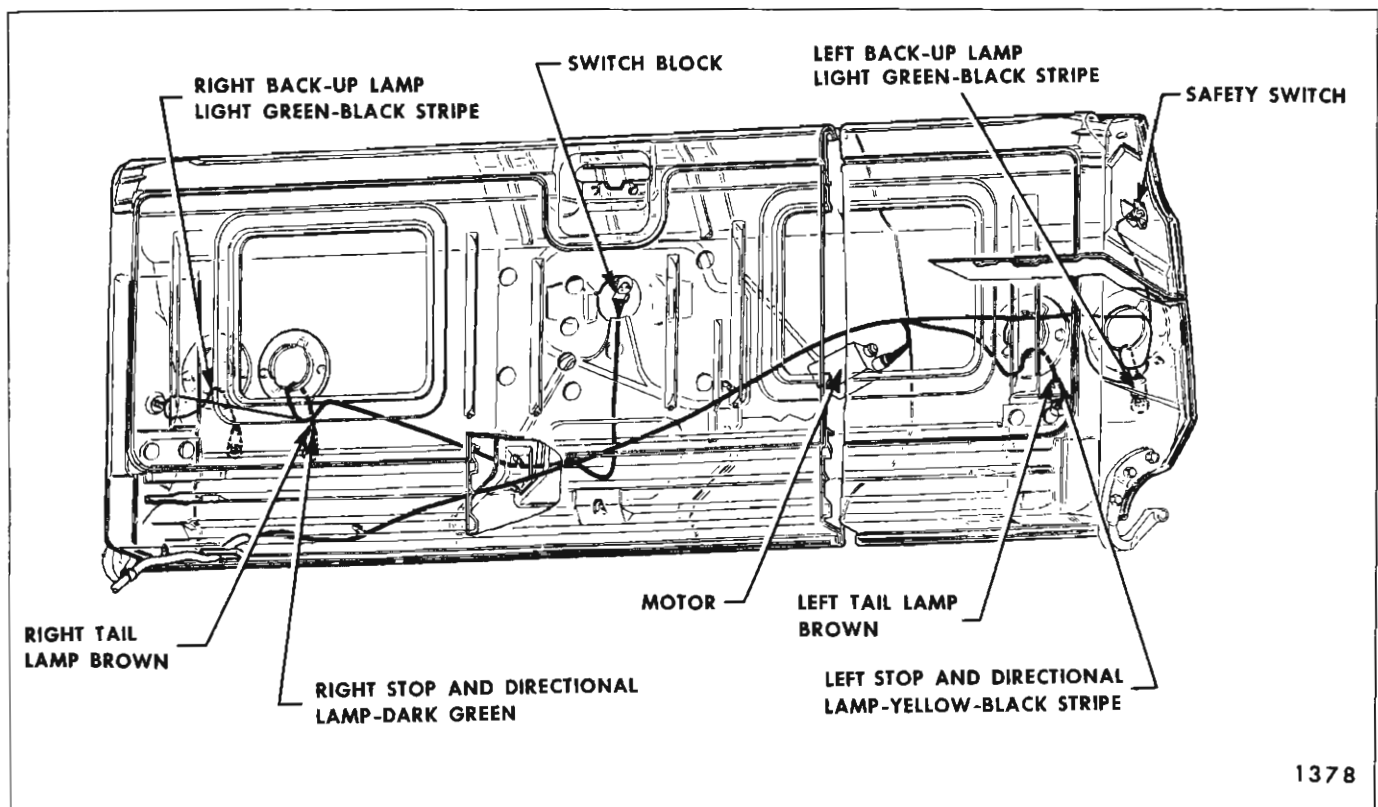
L27—Tail Gate Wiring - 15-16000 (16000 Shown)
